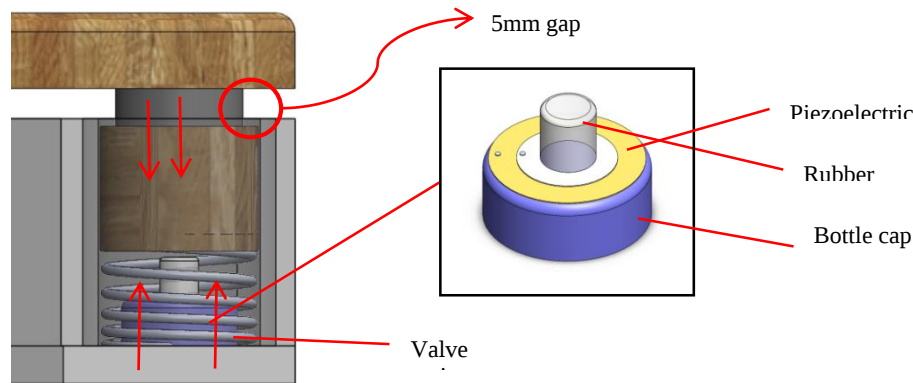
Piezoelectric with bottle cap mechanism used in prototype
